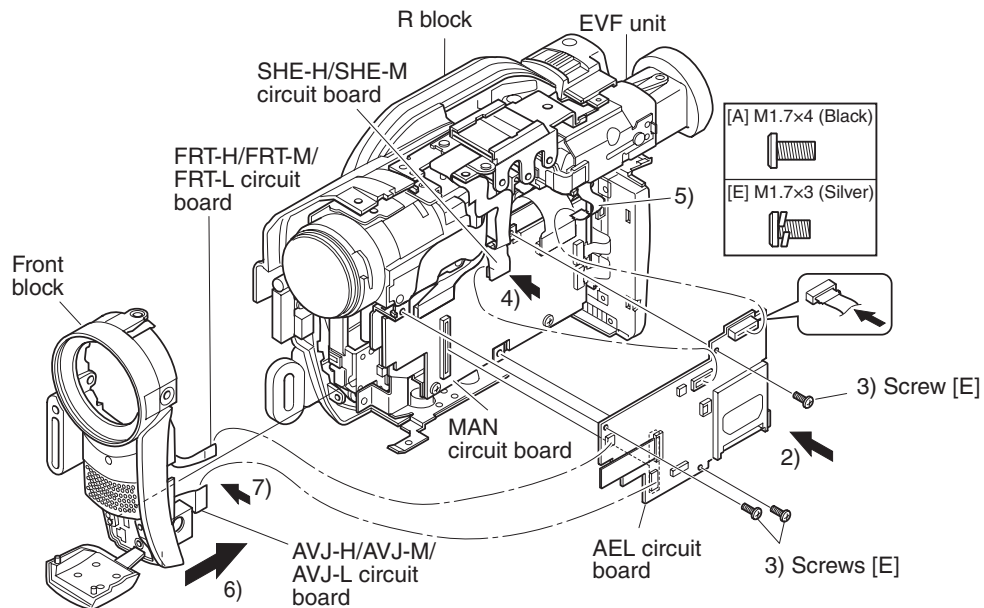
Setting to Service Position (B) [1/2]
